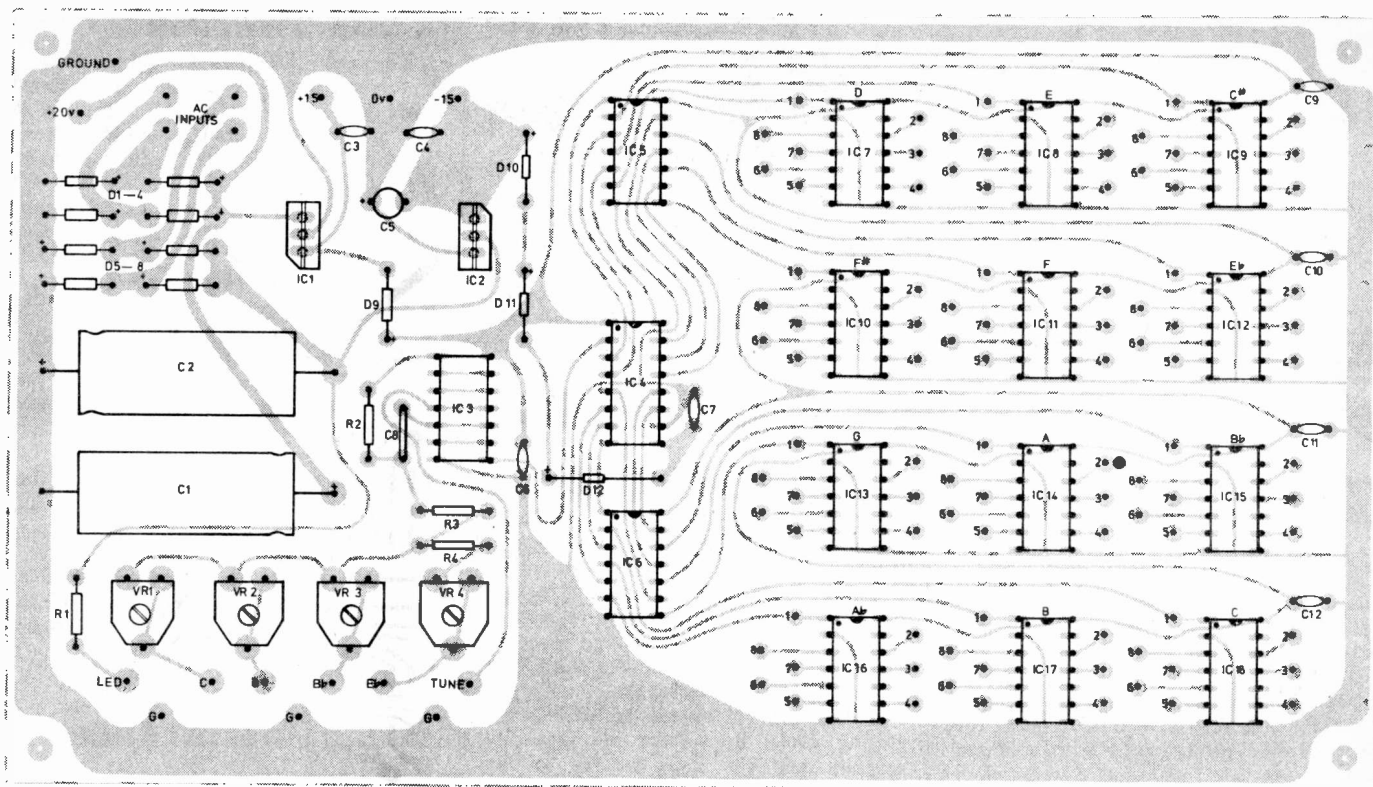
Component layout of P.S.U./Tone Generator p.c.b.
